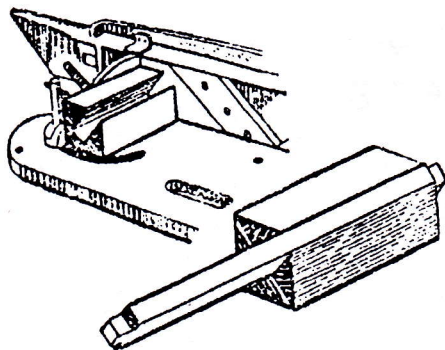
TRIMMER WITH JIG FOR CUTTING SHOULDERS OF TENONS.
